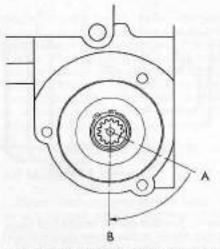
View showing "4 o'clock" position (A) and "6 o'clock" position (B) used in pump drive assembly installation. Refer to paragraph 159.
